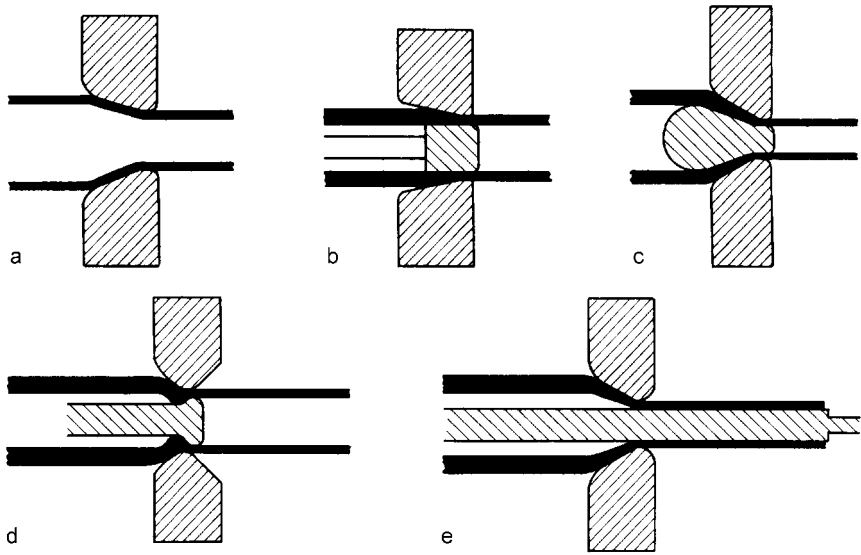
Drawing procedures for tube manufacture. (a) hollow drawing: no inner tool, friction and lubrication from outside only; (b) mandrel drawing using stationary mandrel (fixed plug): friction and lubrication on the outside and inside of the die; application of lubricant can take place through the tubular mandrel rod (see Fig. 15.39); (c) drawing using flying mandrels: used in particular in long tube length on drum drawing machines; a defined amount of lubricant is applied manually before
